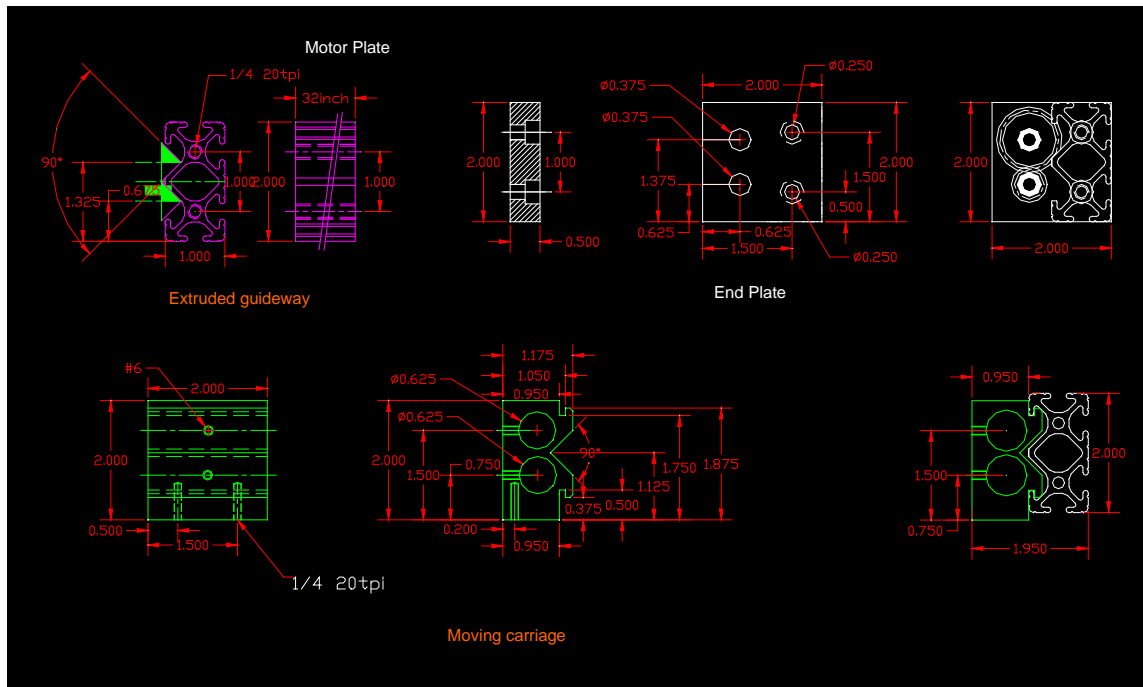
Detailed design drawing of the component of the sensor deployment unit
